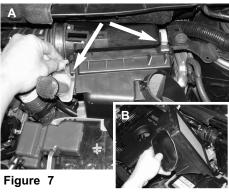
Figure A: Un-clip the two tabs on the top of the air box housing. Figure B: Remove the front of the air box housing
